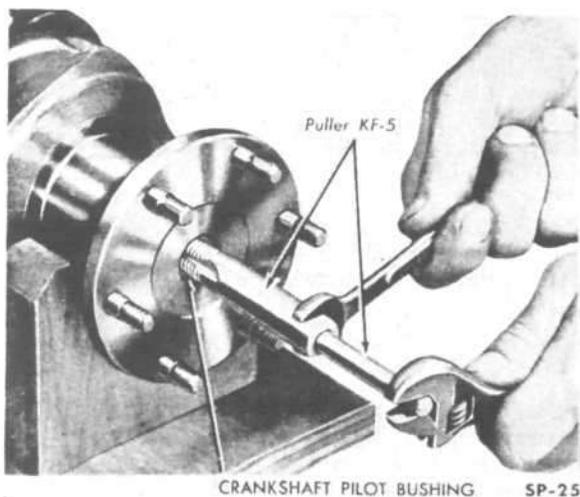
REMOVING CRANKSHAFT PILOT BUSHING
